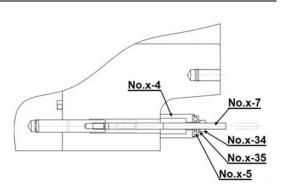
Special Tools for Parallel Pin of GH250S/L
